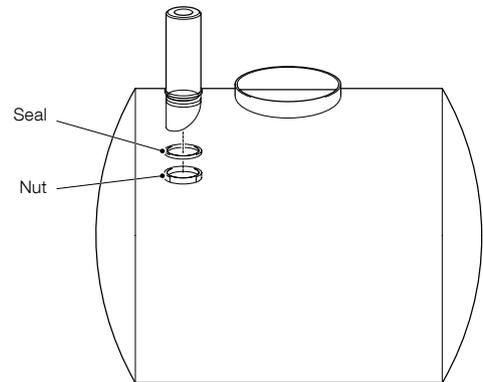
Securing the mounting bracket to the tank using the nut
